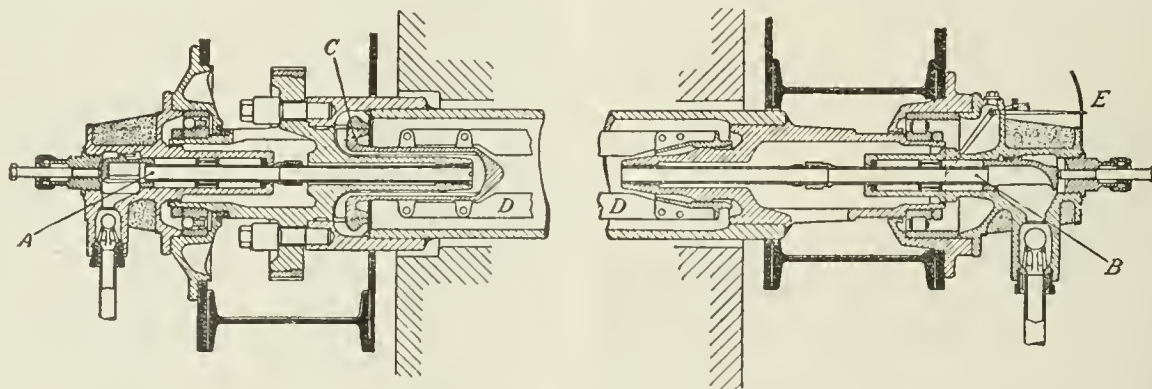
SECTION THROUGH A ROTOR OF THE ATMOS BOILER, SHOWING FEED CONNECTION (LEFT) AND STEAM CONNECTION (RIGHT)
